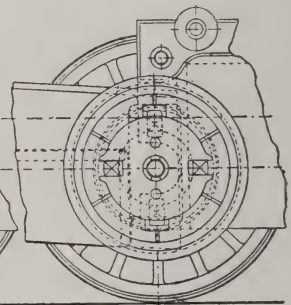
SIDE ELEVATION WITH RIGHT-HAND DRIVING WHEEL REMOVED.
